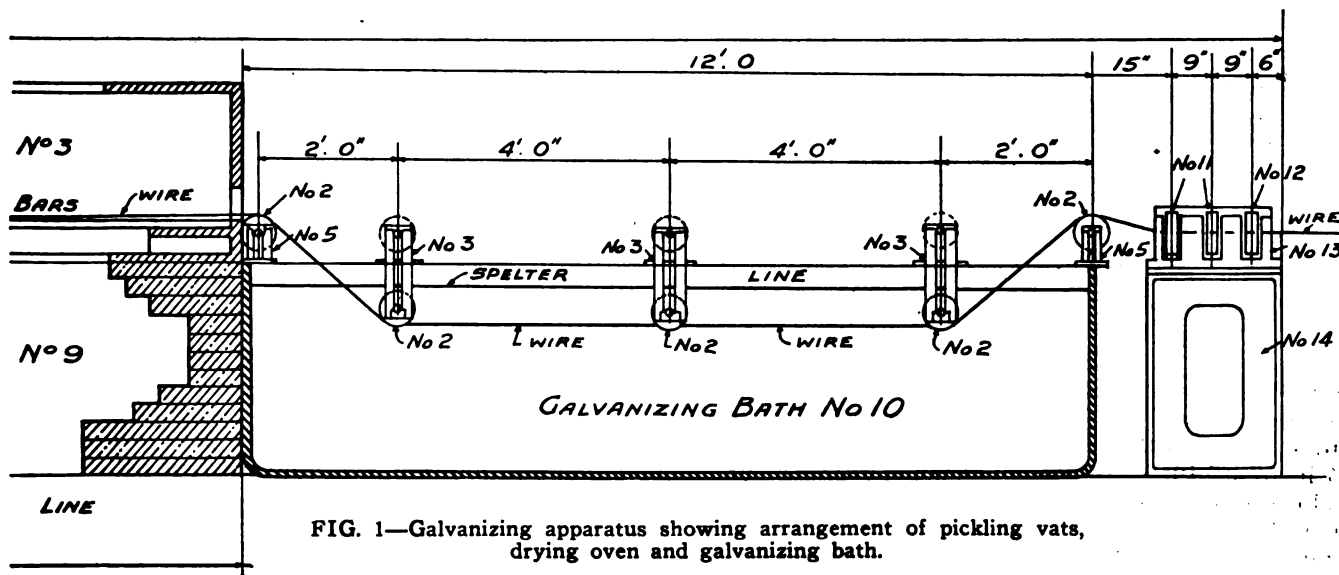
Galvanizing apparatus showing arrangement of pickling vats, drying oven and galvanizing bath.
